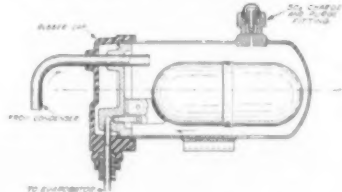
Float valve of the new series is placed in path of incoming air to pre-cool refrigerant.
